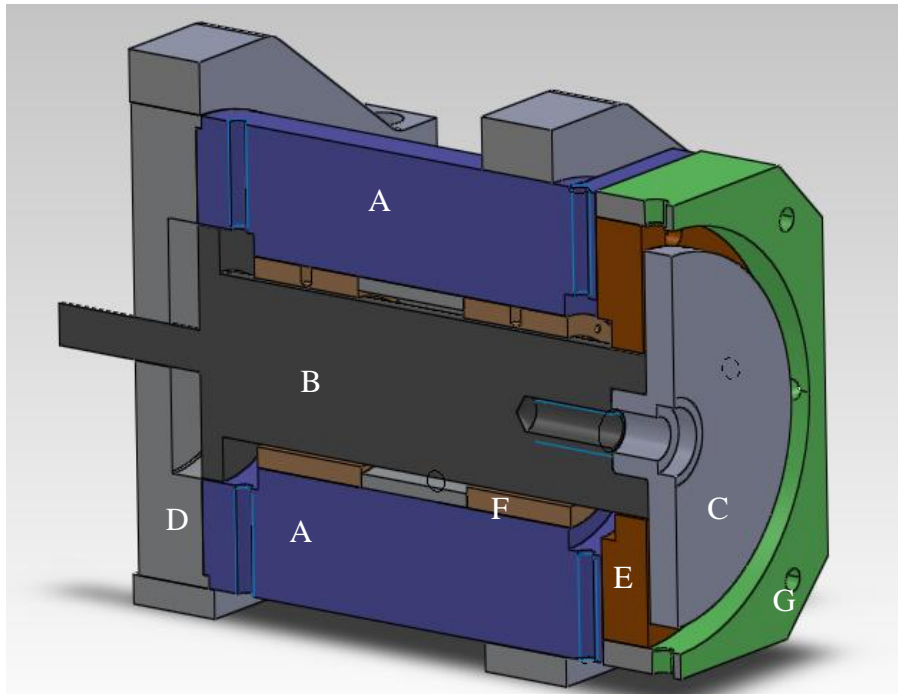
Solid Model of Cross Sectional Bearing Housing
